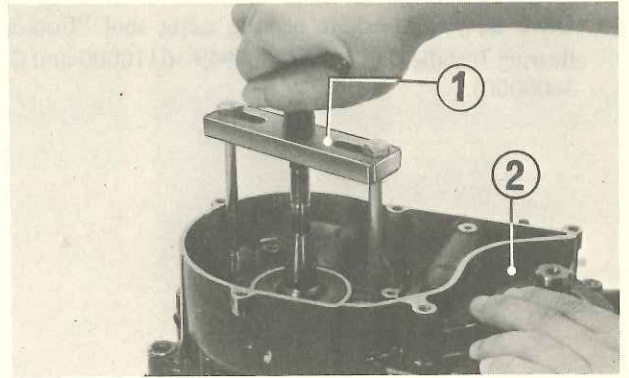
(1) Crankcase disassembly tool (2) Crankcase
